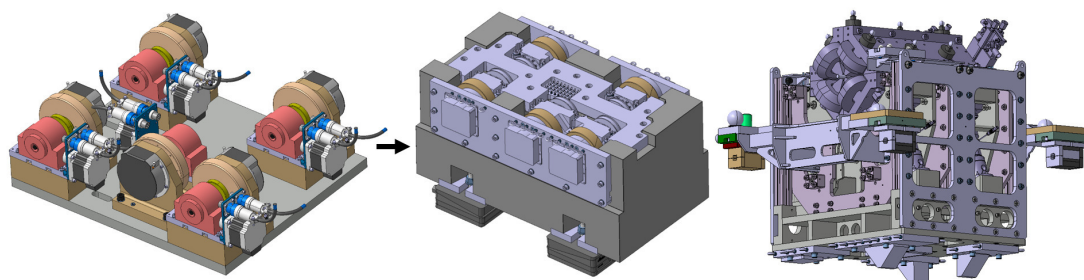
CLIC cam mover prototypes. The previous prototype (left) had five separate actuators as axes whereas the new prototype (middle) has all axes integrated in one body and housing. CLIC MBQ including the planes that interface it with the cam mover is shown in the right.
